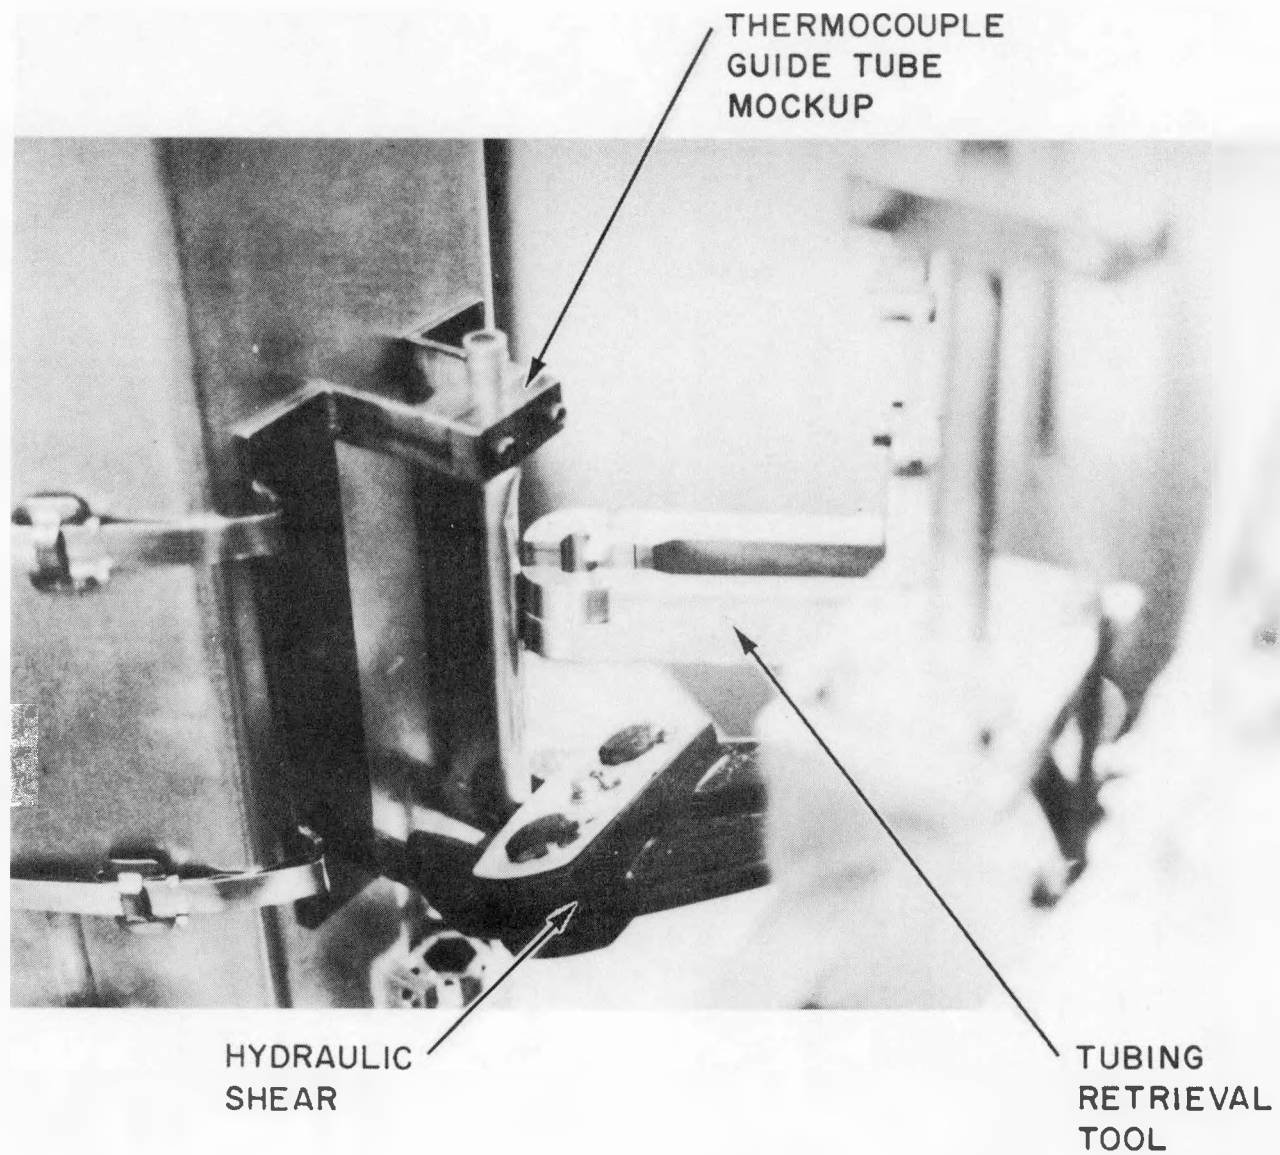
Cutting and Retrieving a Thermocouple Guide Tube Section (Training Mock-up)
